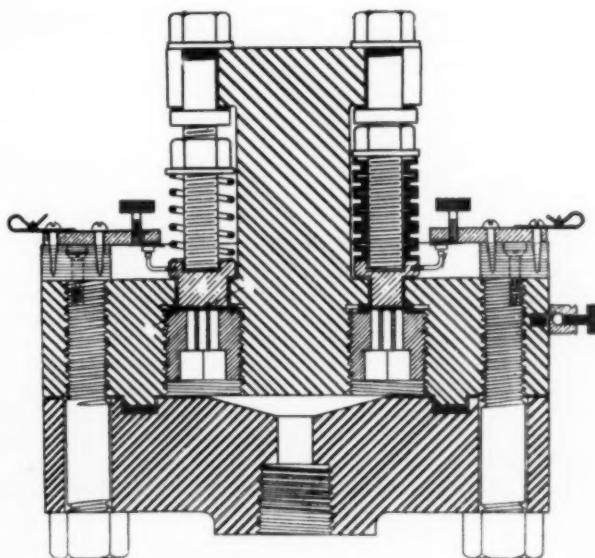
CROSS-SECTION OF OIL-PRESSURE INDICATOR
